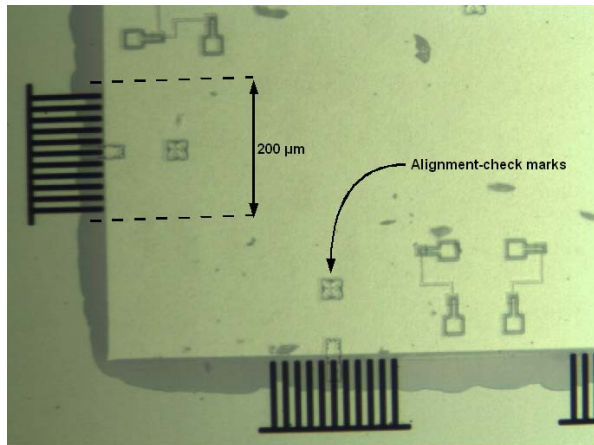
Example of assembly for cavity with guide tabs (dark combs). Alignment is well-constrained.
